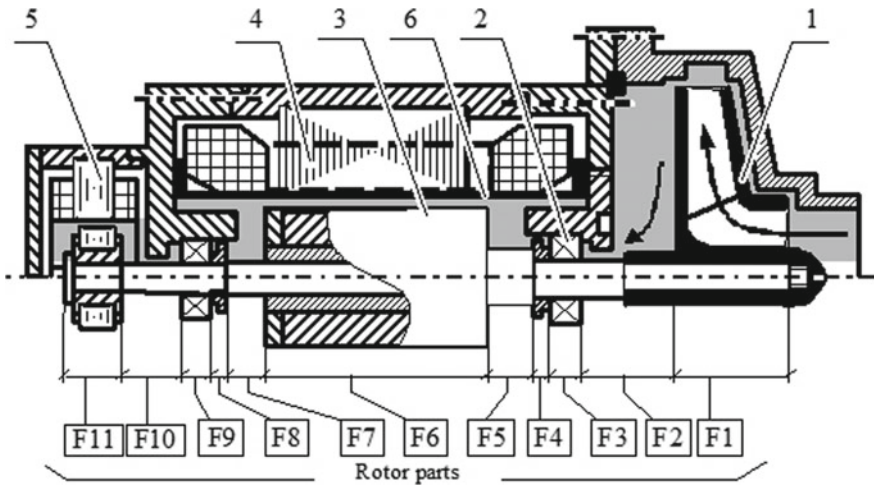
CEDP rotor: 1 impeller, 2 rolling bearing, 3 drive shaft, 4 stator, 5 proximity switch, and 6 shielding sleeve
